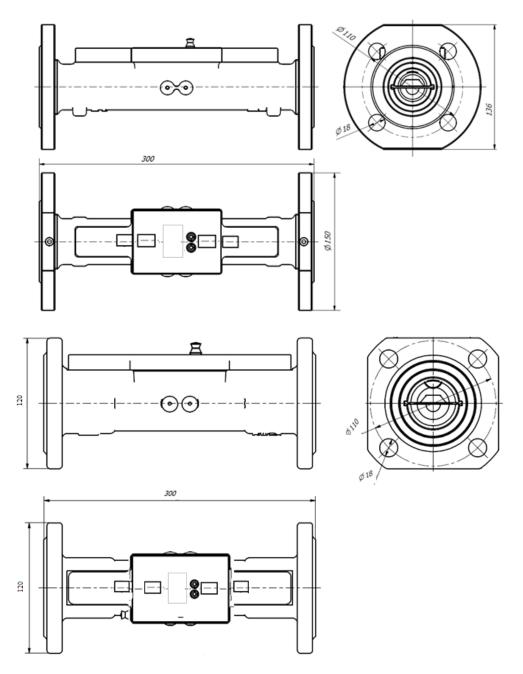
Dimensions of flow sensors DN40, L=300 mm (two design options)
